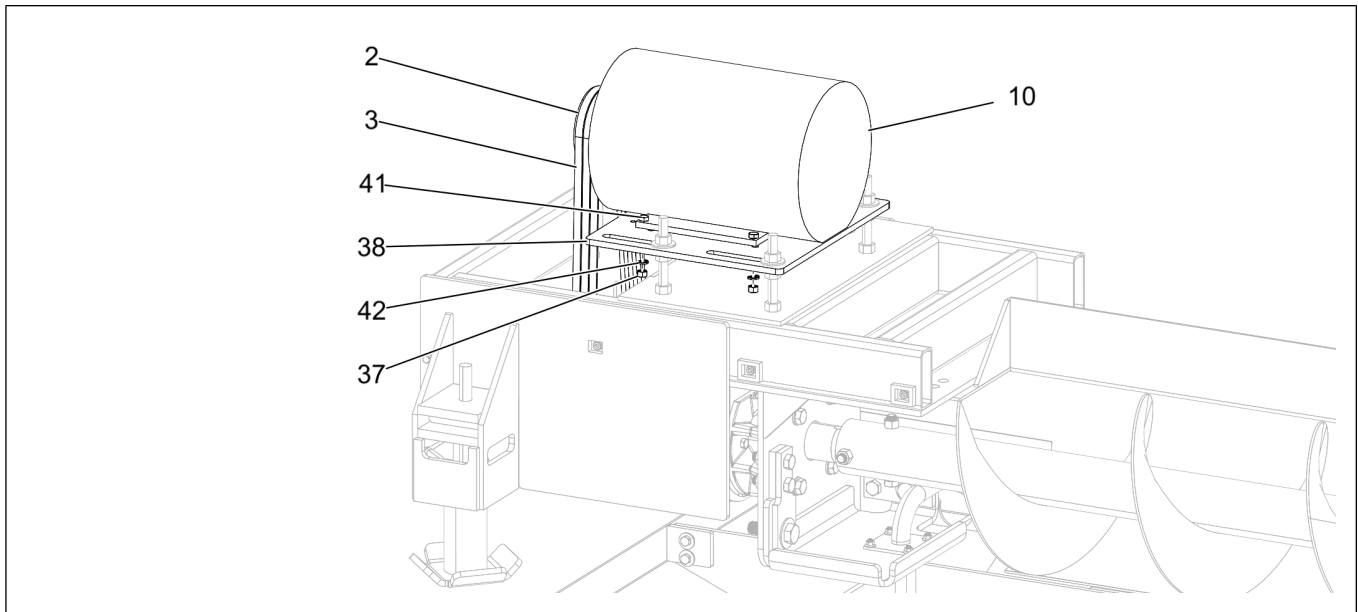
Installing the motor mount plate to the motor frame
